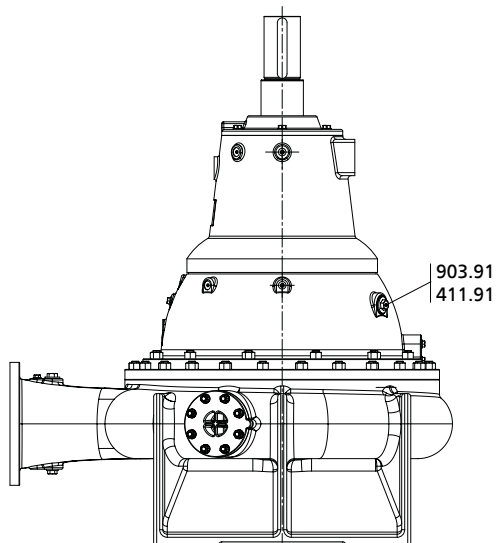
Drilled hole required during manufacturing, bearing brackets S09 and S10
